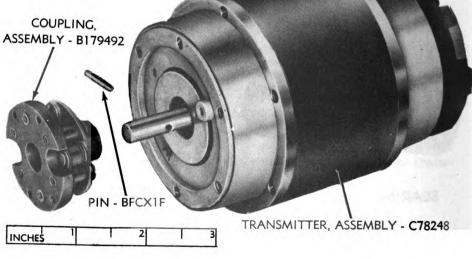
Disassembly of Transmitter and Coupling Assembly B179493
